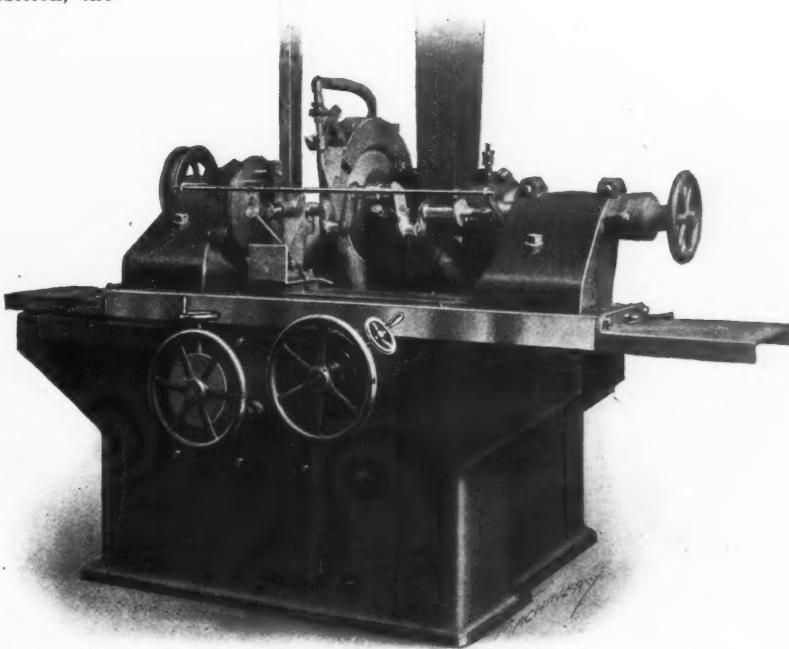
Front View of "Sterling" Grinder built by Young, Corley & Dolan, Inc.
